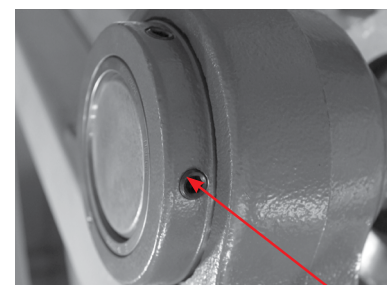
The bearing set screws, one on each side of the rotor, should be checked for tightness every six months.
